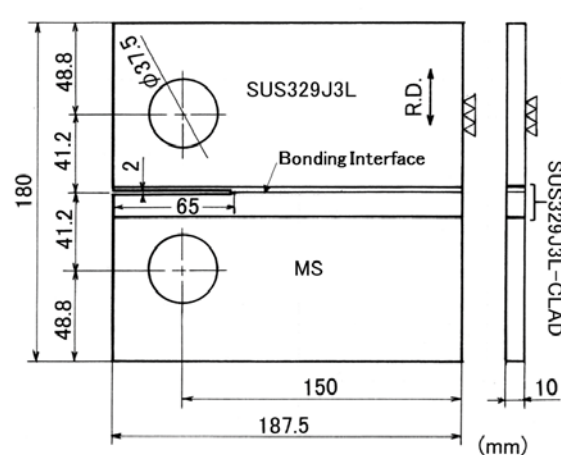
Shape and size of CT type specimen for fracture toughness test
